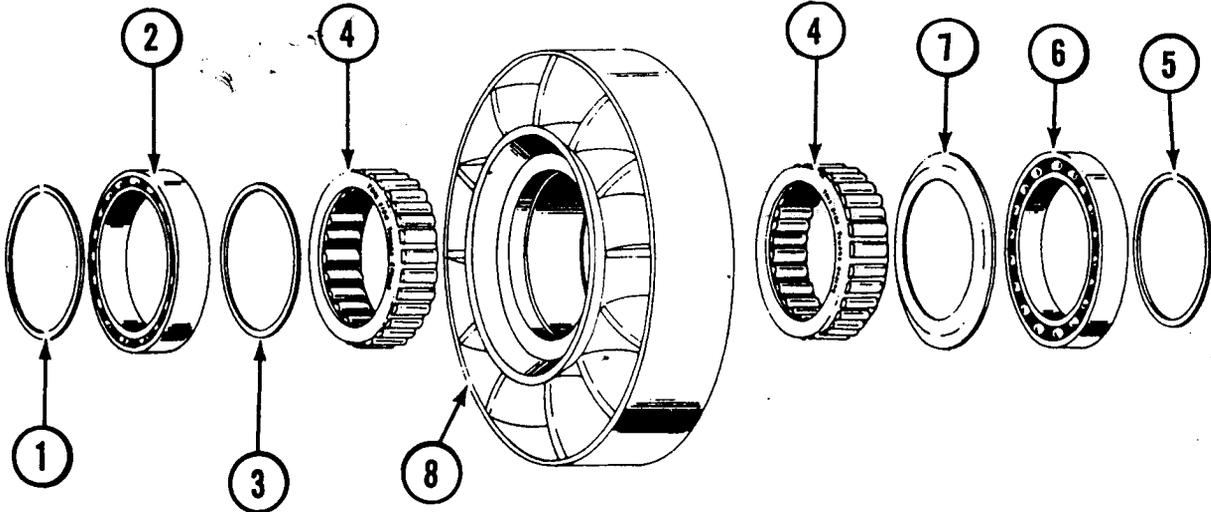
EXPLODED VIEW OF REACTION GROUP
